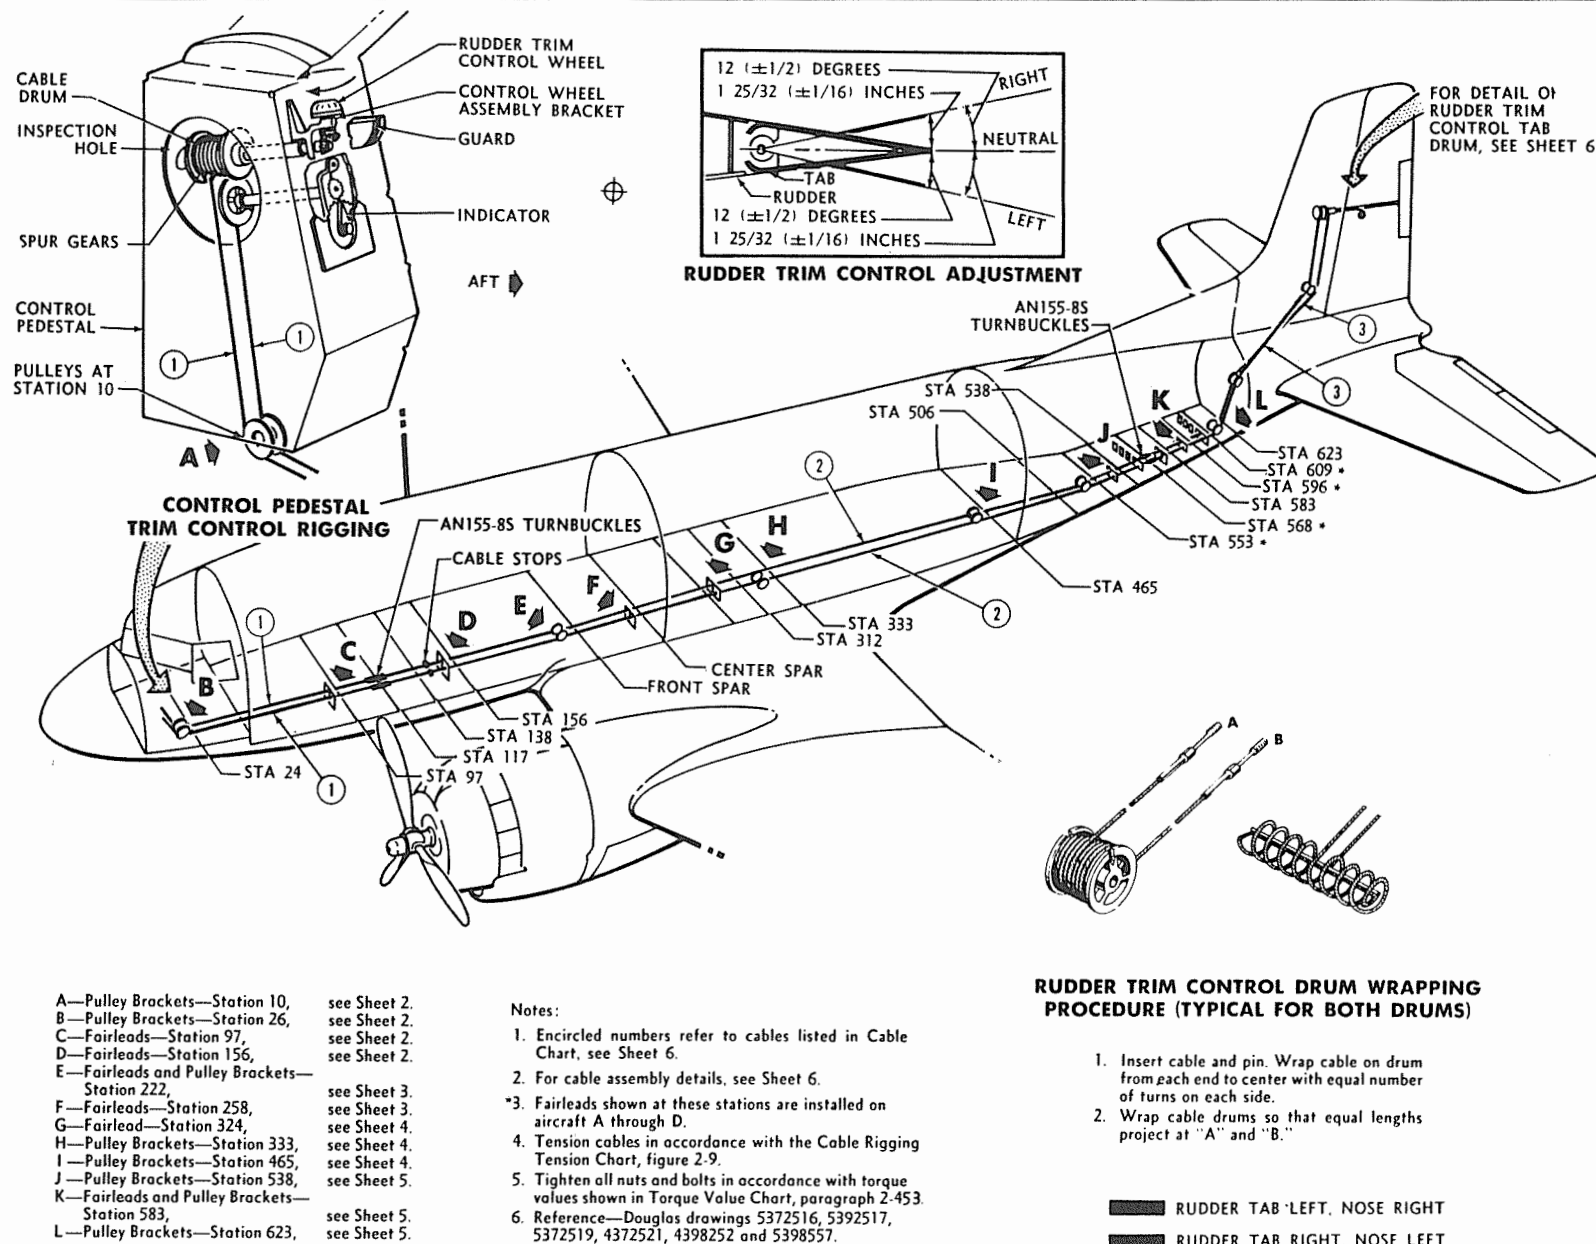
(Sheet 1 of 6 Sheets). Rudder Trim Control System – Key Drawing
